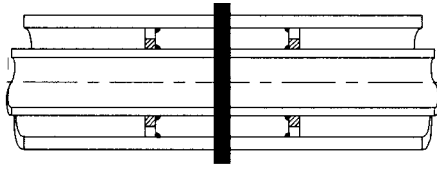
Bring the pipes up to the heating element under the specified initial weld pressure.
